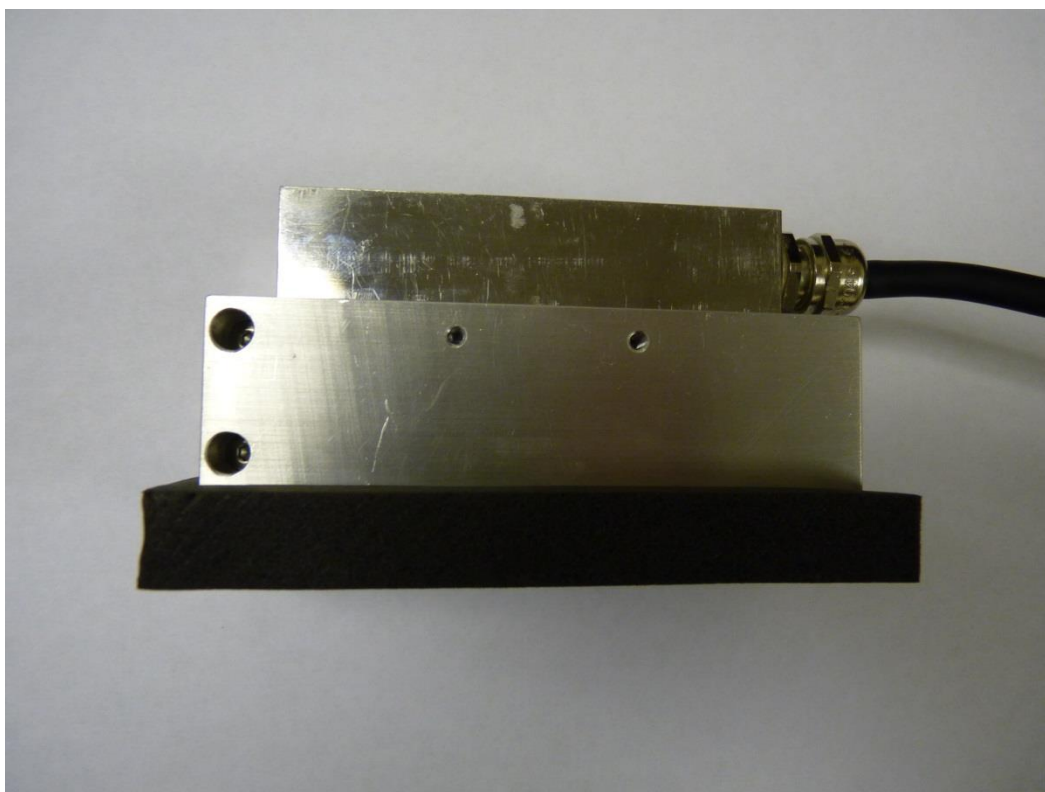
0° water wedge for inspecting EF joints, with phased array probe and sealing skirt attached.
